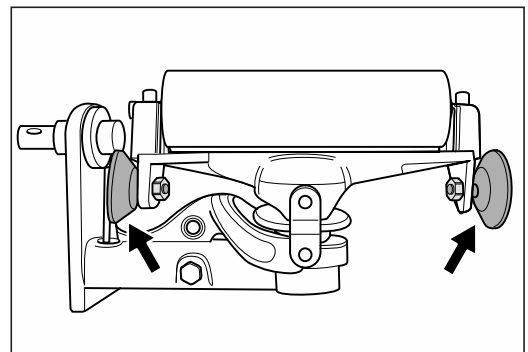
The two guide rollers must be rotatable easily! Otherwise they must be replaced! Similar to figure.
